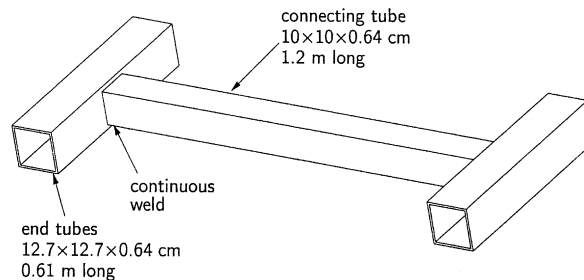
Sketch of the welded steel frame used in the experiments.
